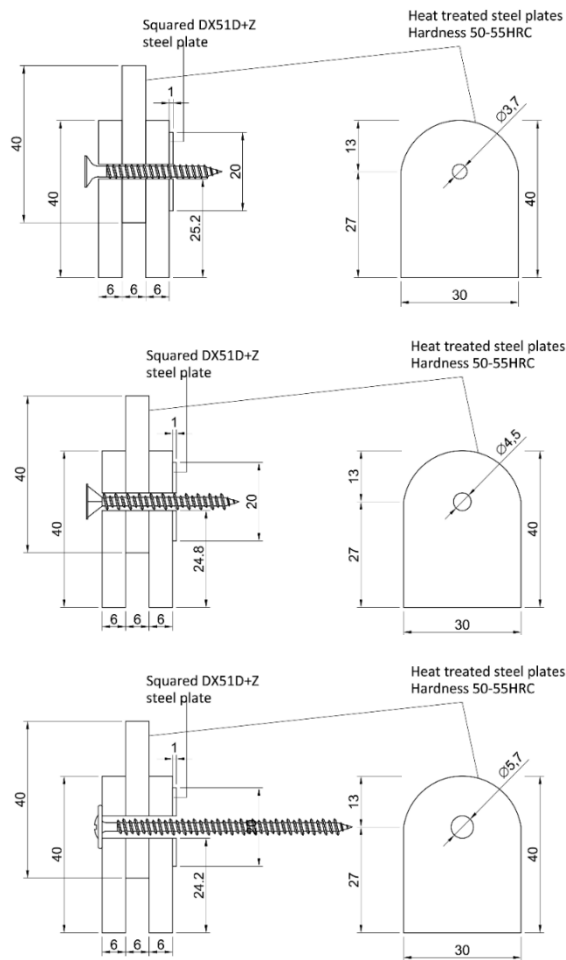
Drawings of the test set-up: a) Set-up for 3.5 mm diameter screws; b) Set-up for 3.9 and 4.2 mm diameter screws; c) Set-up for 4.3 mm diameter screws
